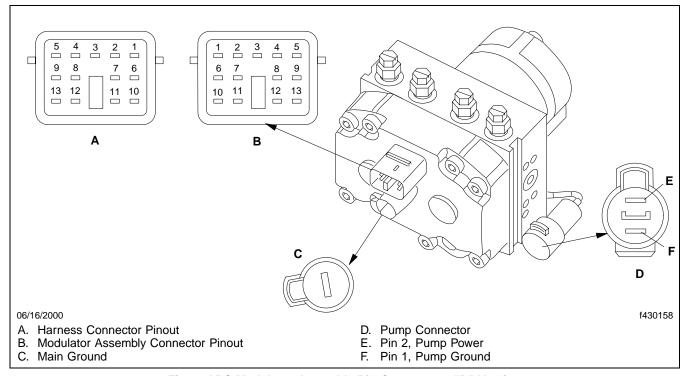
, ABS Modulator Assembly Pin Connectors, "D" Version
